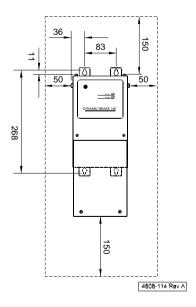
Mounting of the B140 indicating 150mm clear air space top and bottom and 50mm air space on sides
